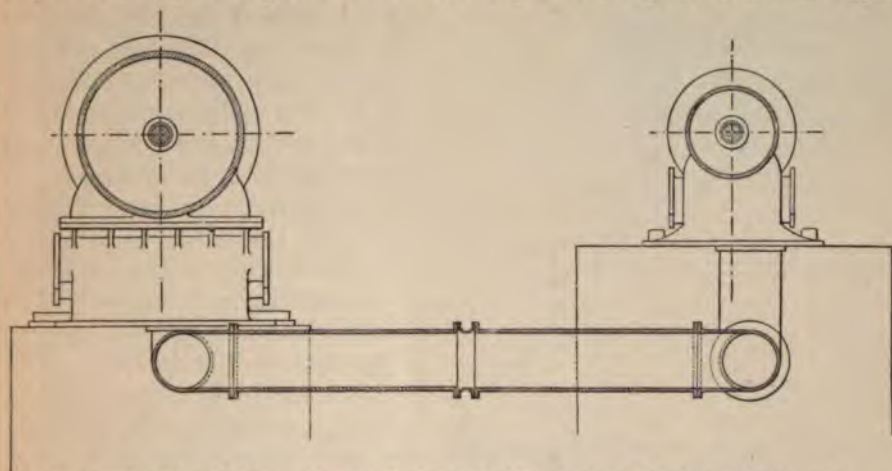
Goodfellow & Matthews' Receiver Engine, Astley Mill: Section of Cylinders and Receiver-pipe. Scale 1/72d.
